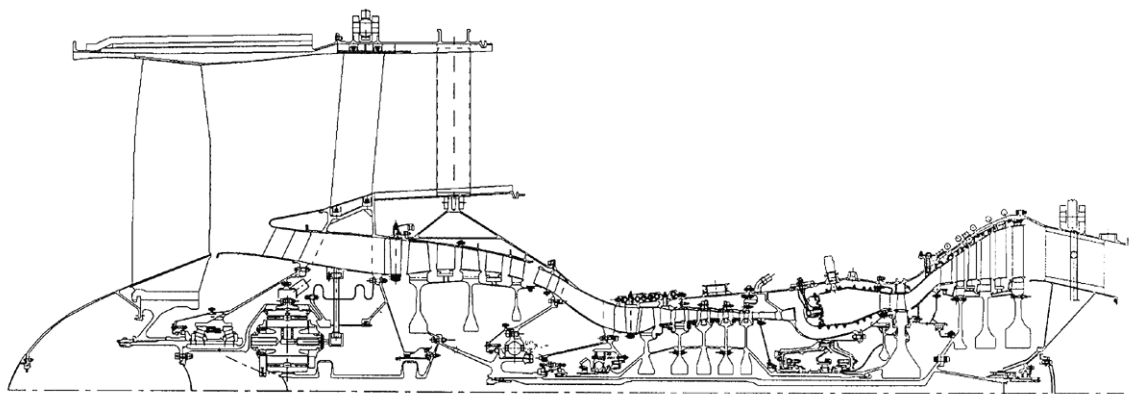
PW 8000 geared turbofan [Courtesy of P&W].
